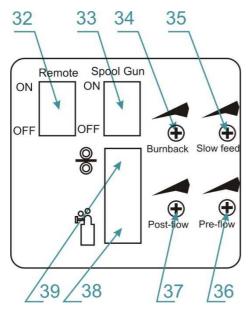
Secondary control panel – panel in the space of the wire feeder
